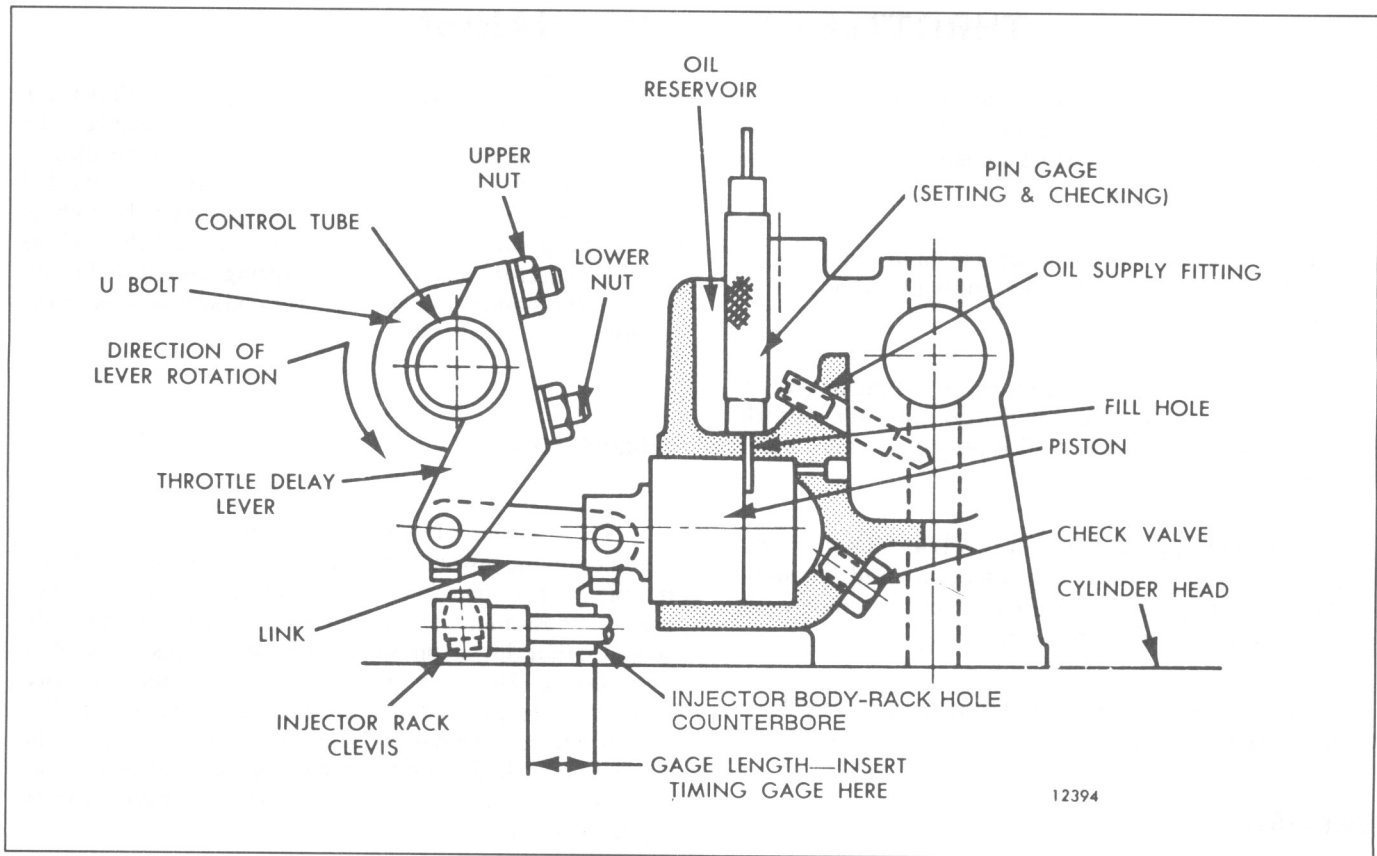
Adjusting Throttle Delay Cylinder (Current)
